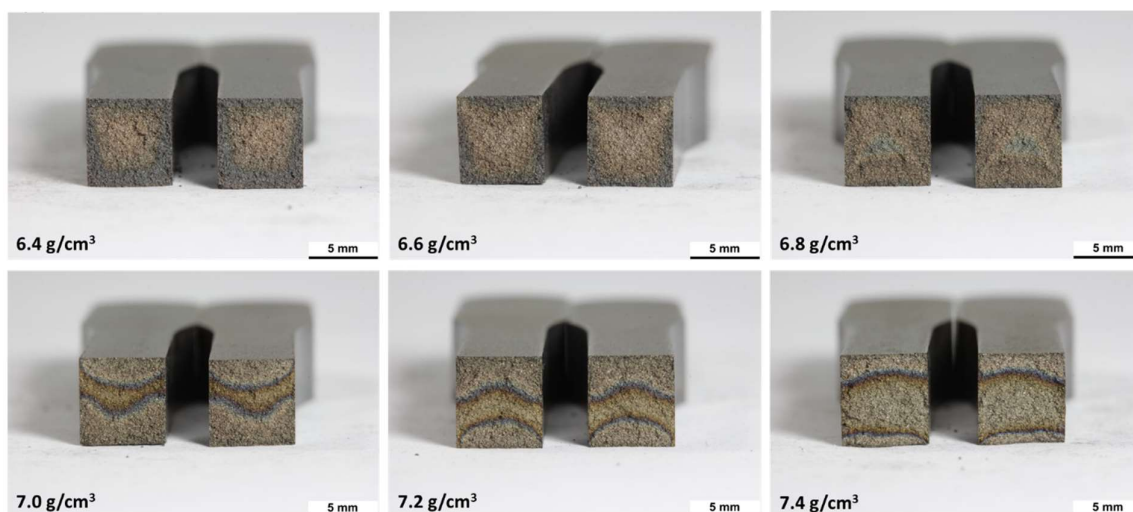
Images of fracture surfaces of cured Ancorlam with coarse particle size
